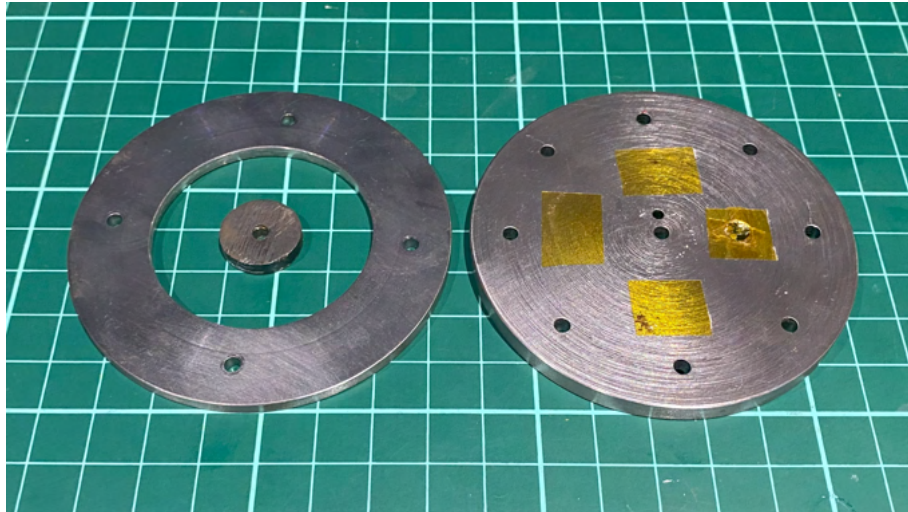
Machined EN1A steel components for the thruster magnetic circuit including the pole pieces (left) and the baseplate (right).
